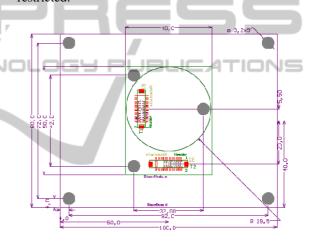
Dimension and placement of holes for the three different modules formats. Boards are dimensioned from the centre. Origin is the lower left corner.
